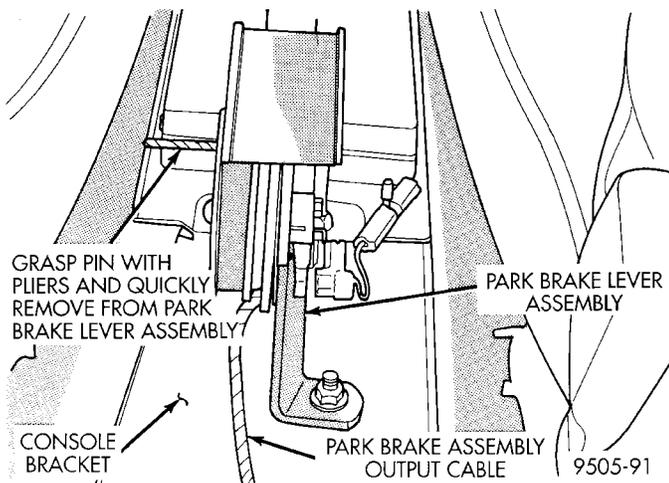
Removing Lockout Pin From Park Brake Lever Assembly
